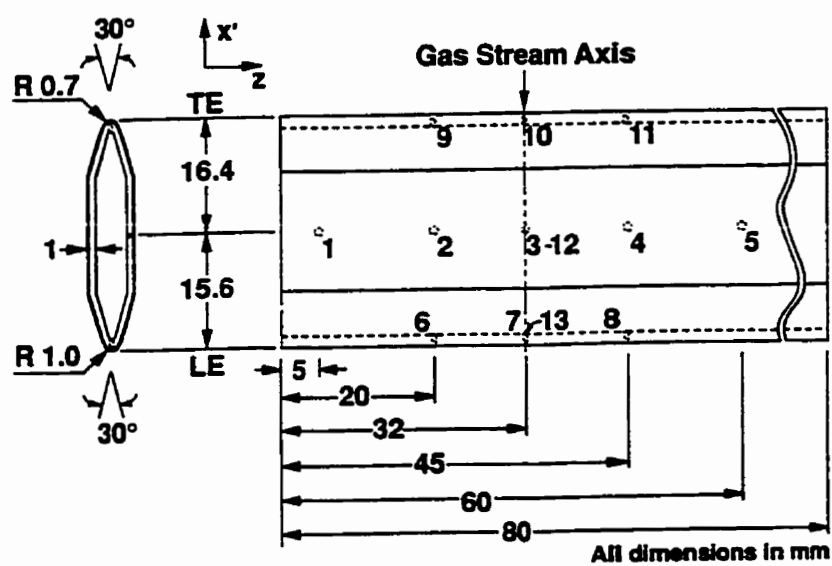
Schematic of the instrumented shell-like specimen showing the 13 locations where thin-wire thermocouples were spot-welded inside the specimen.
